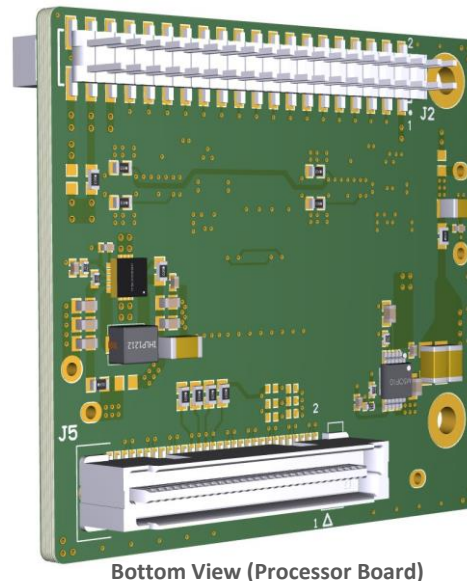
Technical Drawing of FPA-4.A/TXA-V1
